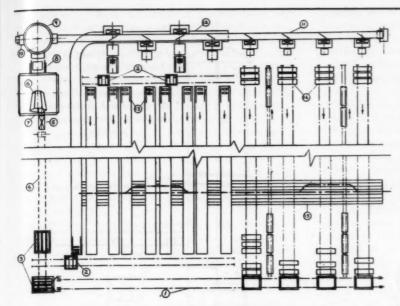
Sand and mold handling layout: (1) apron conveyor; (2) transfer car; (3) vibrating shake-out; (4) magnetic belt conveyor; (5) elevator; (6) hexagonal revolving screen; (7) sand storage bin; (7A) measuring hopper; (8) bucket loader; (9) mixer with dust hood; (10) aerator; (11) distributing belt conveyor; (12) flask return roller conveyor; (13) roller conveyors; (14) pallet lines, (15) pouring platform.
